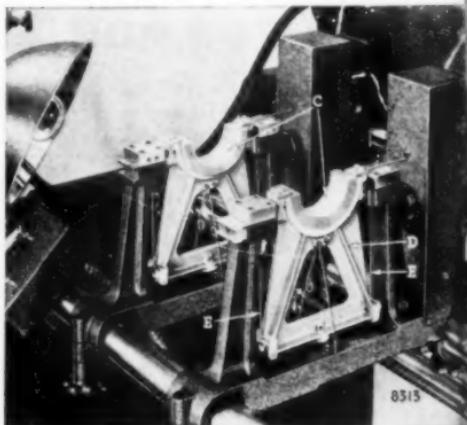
Closeup of half-bearings in which piece to be tested is mounted.
